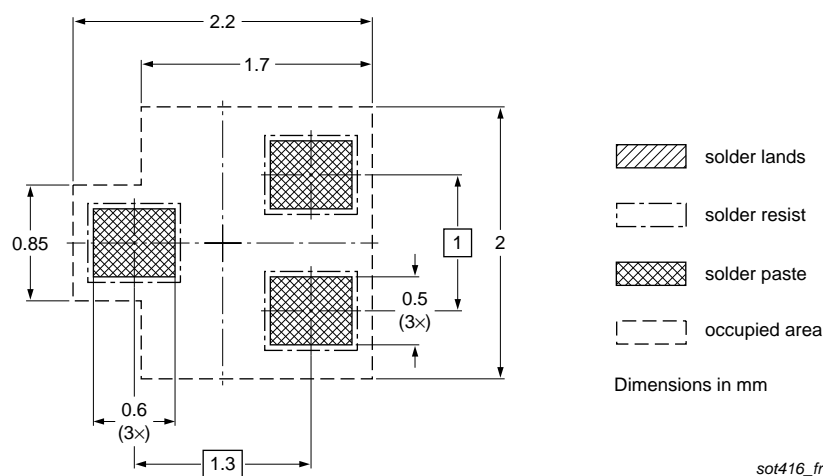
Reflow soldering footprint SOT416 (SC-75)
